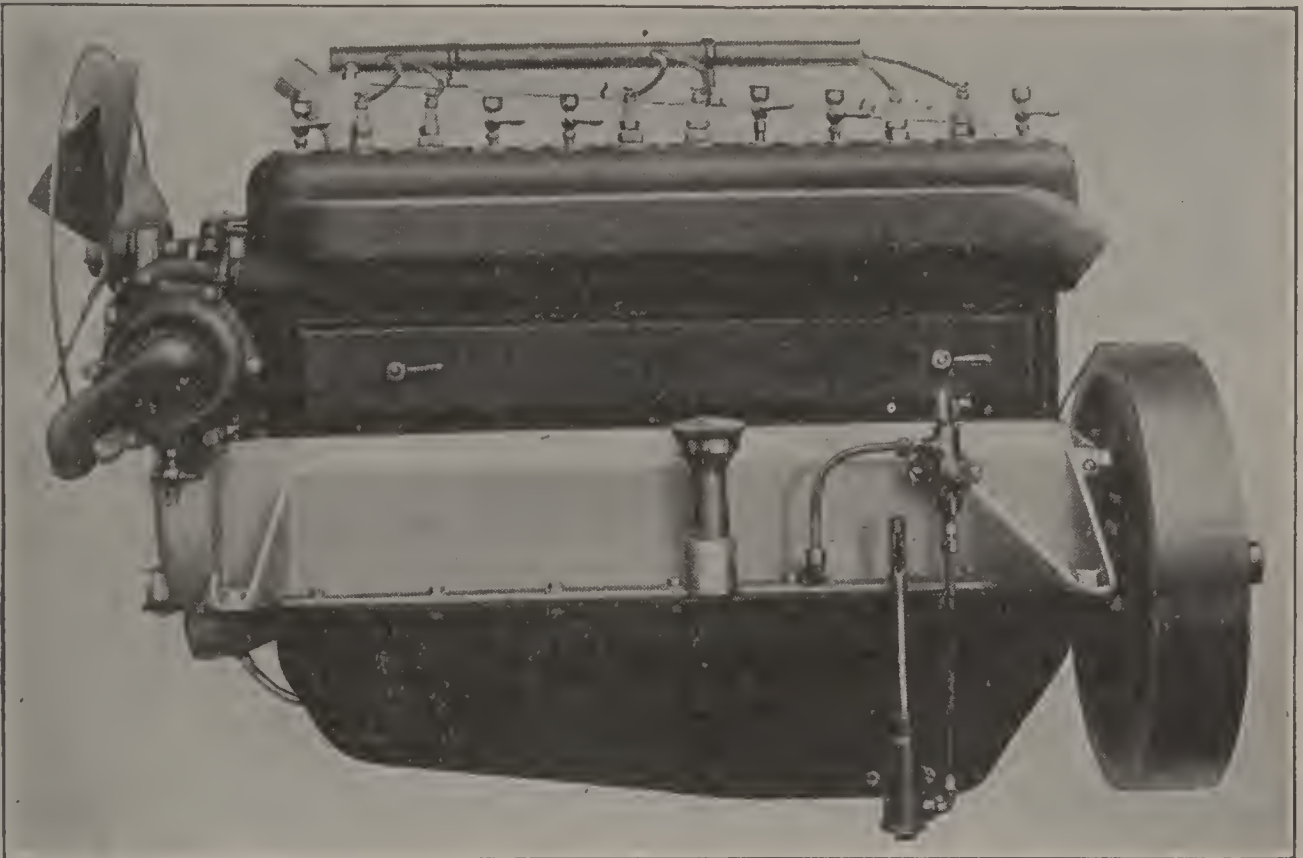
Studebaker Six-Cylinder Motor Showing the Block Castings of the Six Cylinders
